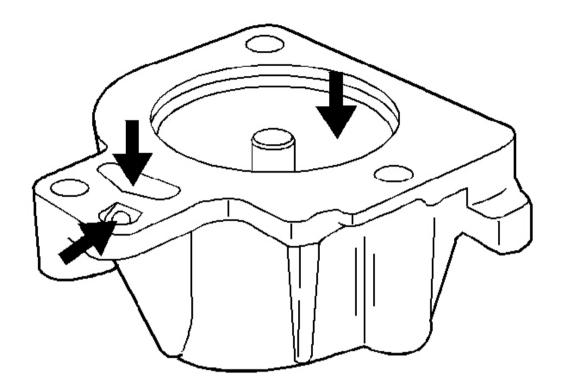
Inspecting The 1-2 Accumulator Cover Courtesy of GENERAL MOTORS CORP.
